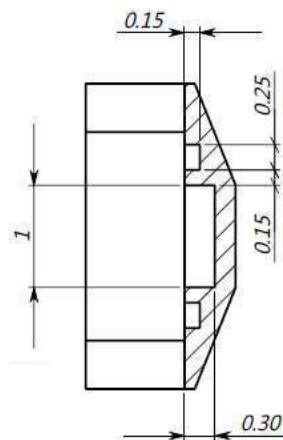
Dimensions of the Sliding Hall Probe (SHP). All measures are in millimetres (mm). The maximum tolerances:
